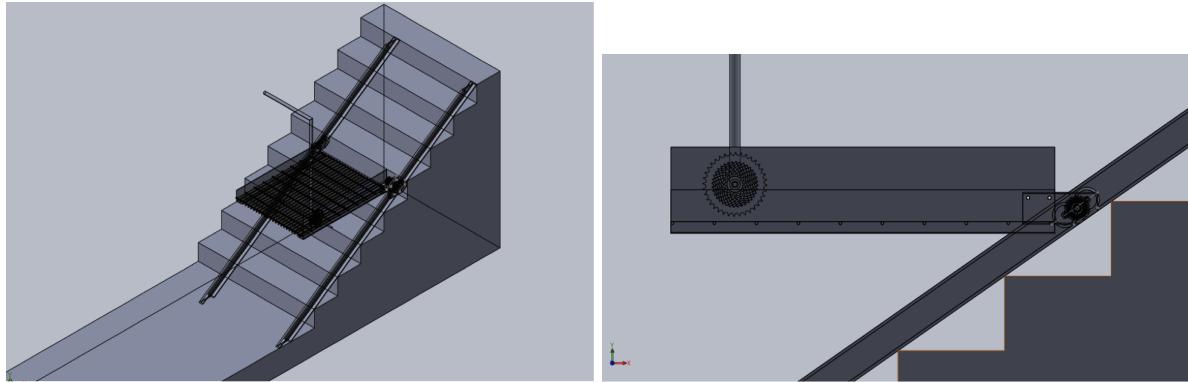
Diagram of final manual lift design: isometric view (left) & side view (right)
